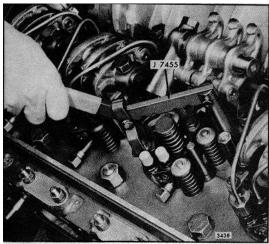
Removing Exhaust Valve Spring (Four-Valve Head Shown)
